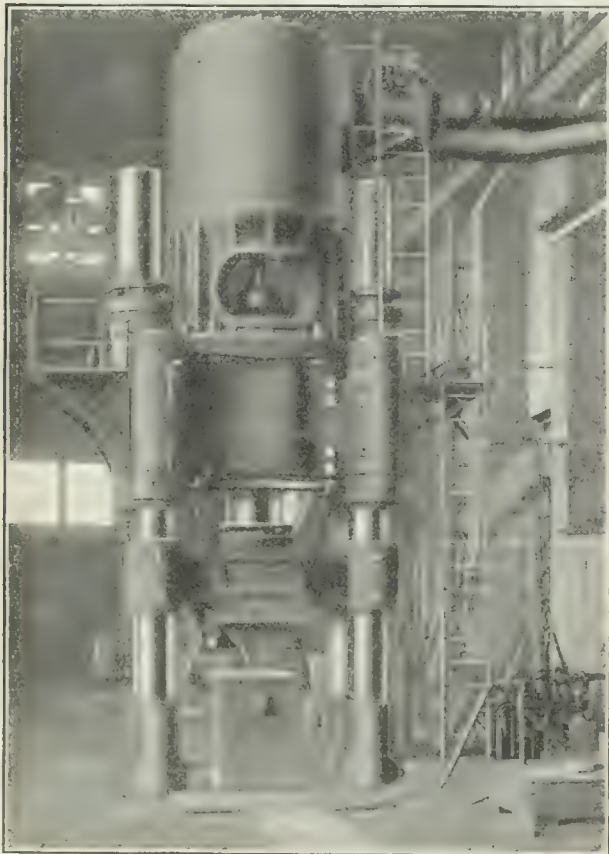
The Haniel & Lueg Steam Hydraulic Forging Press Built by the Mesta Machine Company, Pittsburgh, Pa.
